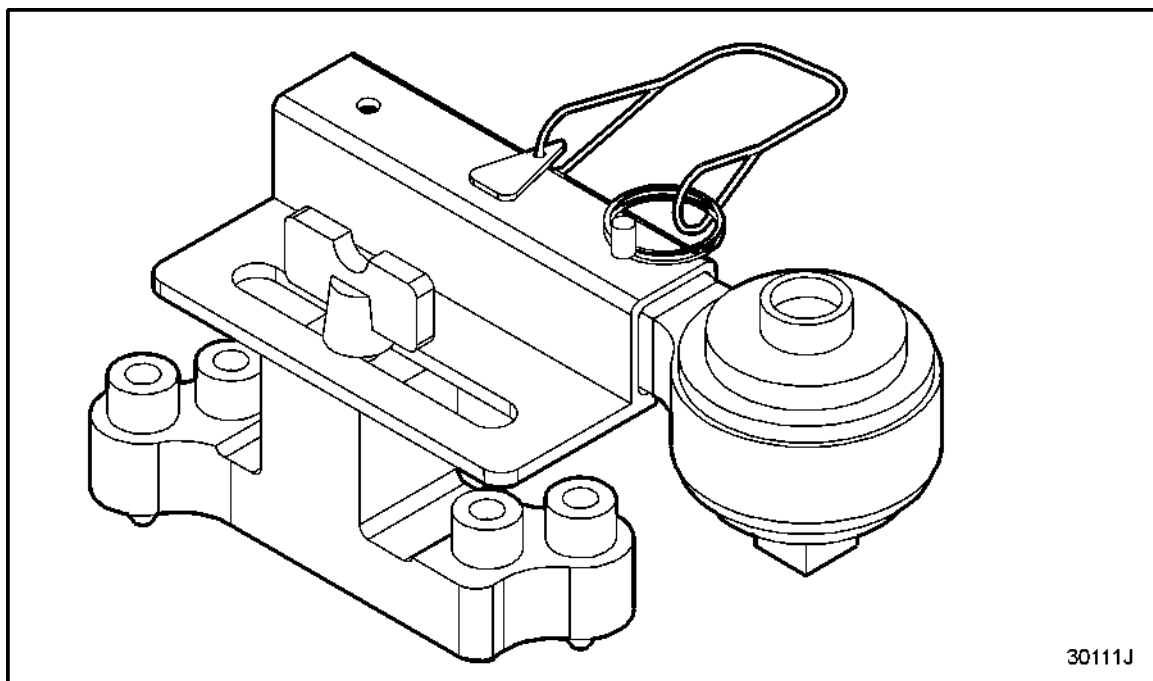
Torquing Device -Main Bearing Bolts,J 35371
